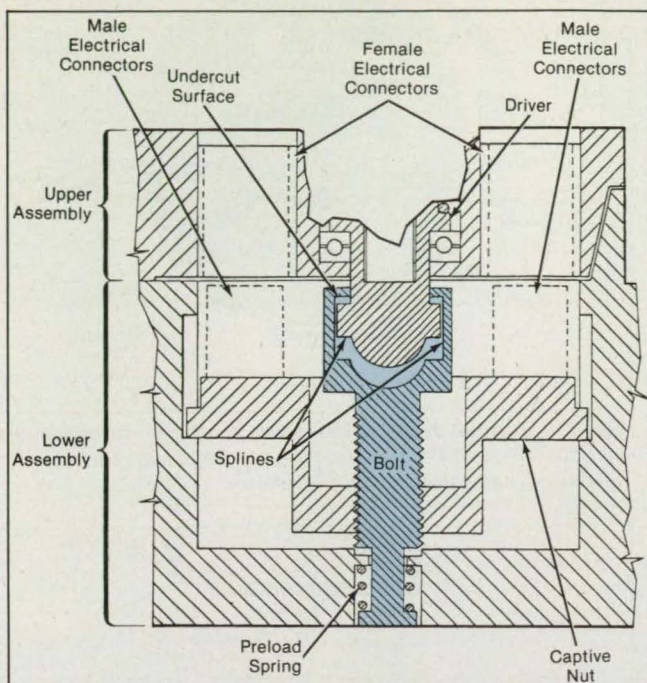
The Mechanism Inside the Lower Assembly provides spring preload between the two assemblies plus mating of electrical connectors, all actuated by rotation of the driver engaged with the bolt via splines.
